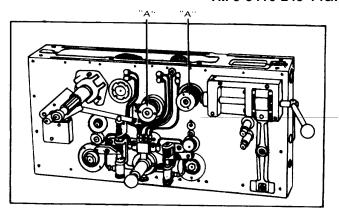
Front View of Apron with front cover plate removed exposing all adjusting members
